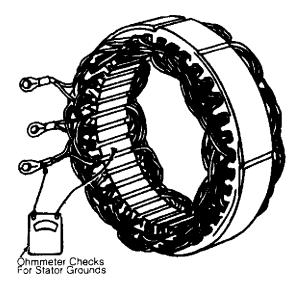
Testing Generator Stator (CS144) Courtesy of General Motors Corp.
